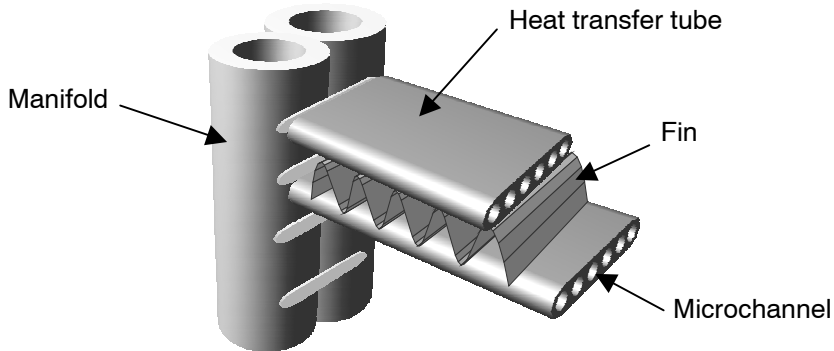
Principles of CO₂ heat exchanger geometry using “multi-port” extruded tubes with microchannels, folded fins, and a compact “double barrel” manifold.
